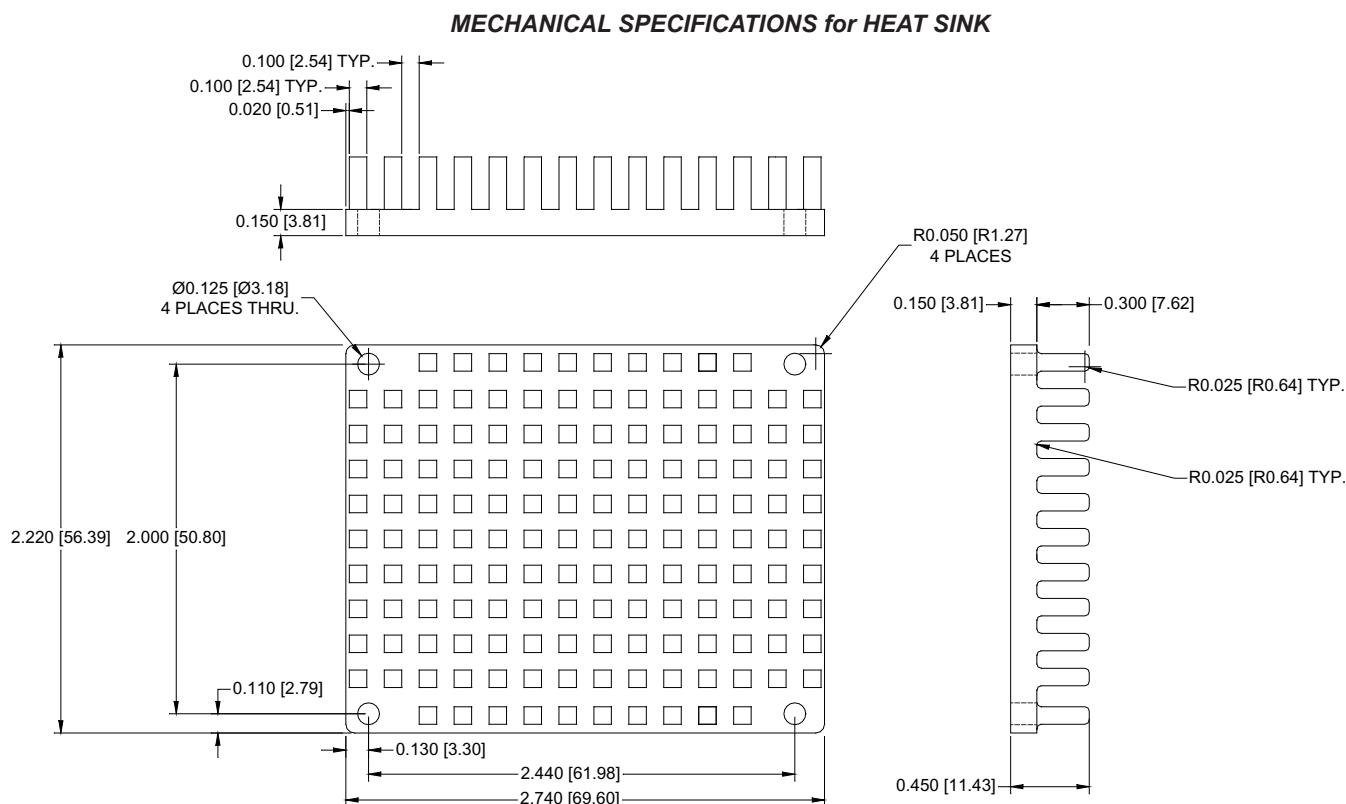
Mechanical Specifications of Optional Heat Sink for the Q50000, Q50001
